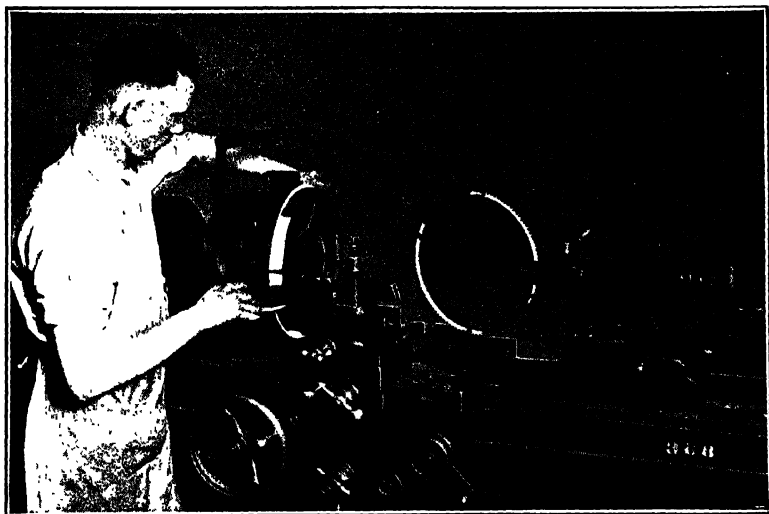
Turning a Flywheel for a Starter Ring Gear.
